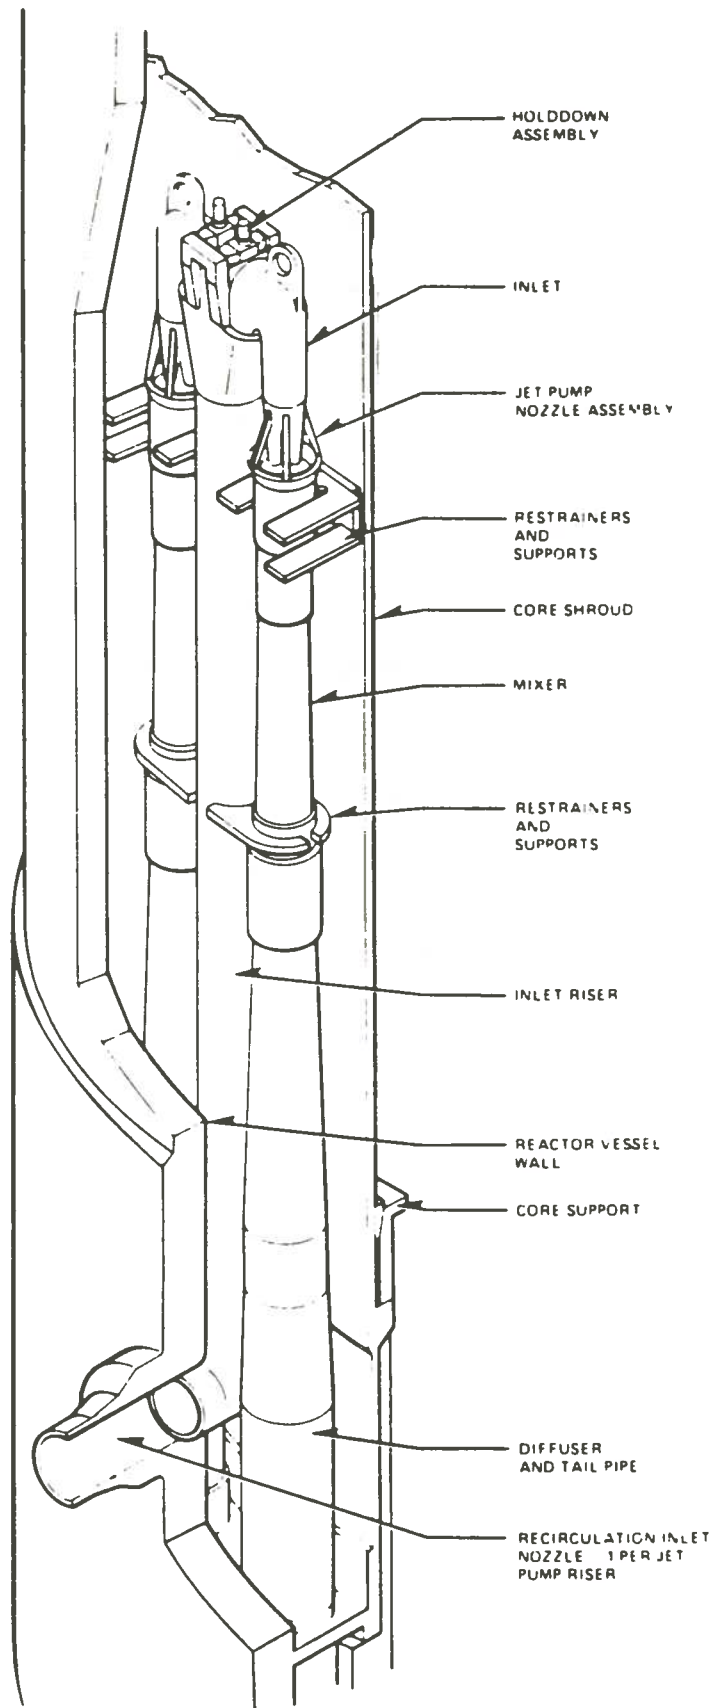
Jet pump assembly. (Per GE⁸)
